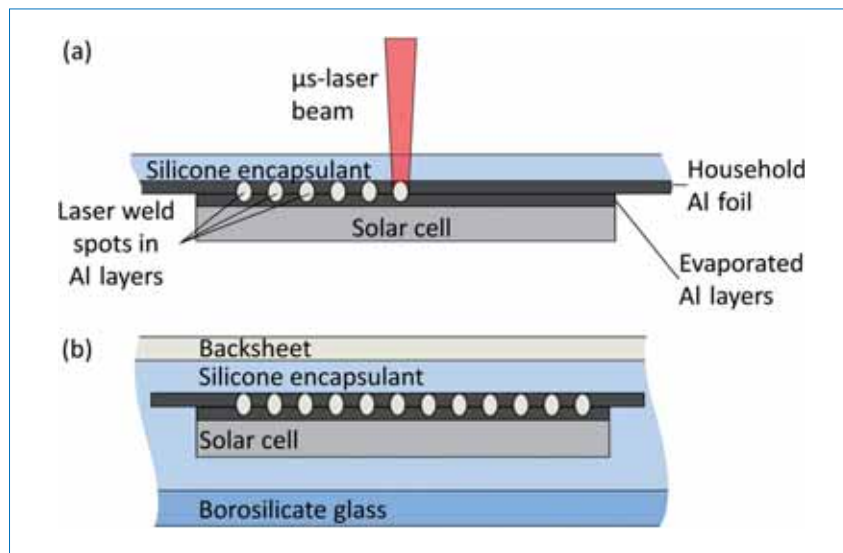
Schematics of (a) the laser weld process, and (b) the final lay-up of the module. (Adapted from [45].)
